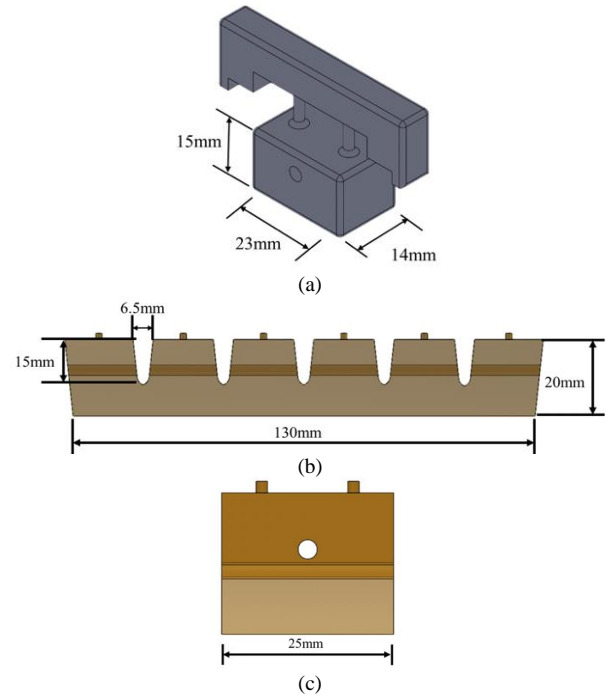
Dimensions of the soft finger parts: (a) angular view of the embedding part shown in Fig. 2 (a); (b) side view of the released soft finger shown in Fig. 2 (d); (c) front view of the finger where the center hole is for the insertion of the cable.
